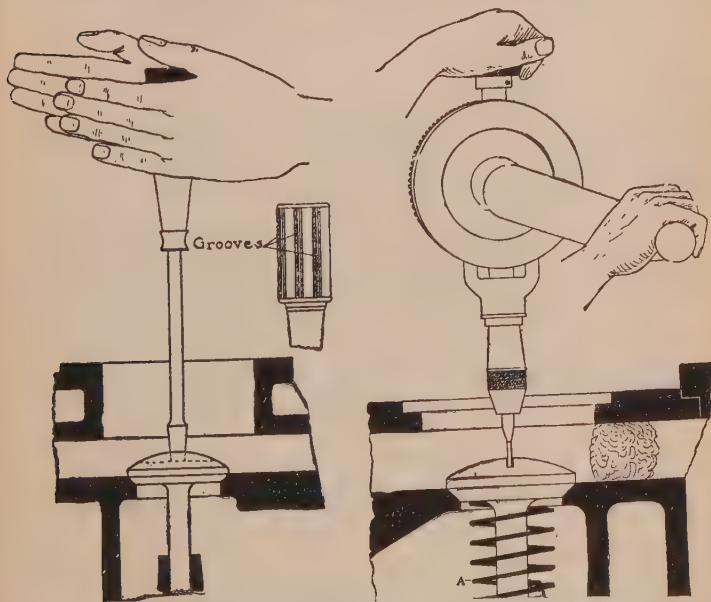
Method of using a screw driver for valve grinding. A handful of waste or a cloth is put in the valve port to protect the cylinder, and the valve face coated with a paste of the emery powder and oil and put in place. The handle of the screw driver is now held between the palms of the hands as in the sketch, and a series of oscillations through a small arc given to the valve by moving the palms in opposite directions. After about thirty of these oscillations have been given, the valve is lifted from its seat, given a half turn, and resealed for further grinding in the same manner. This operation should be continued with occasional additions of oil and emery, until the valve face and the seat appear to be bright for their full width around the circle.
